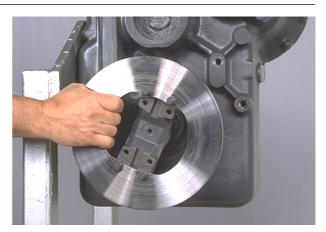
Flange removed. NOTE: brake disc is optional and was removed with flange.
